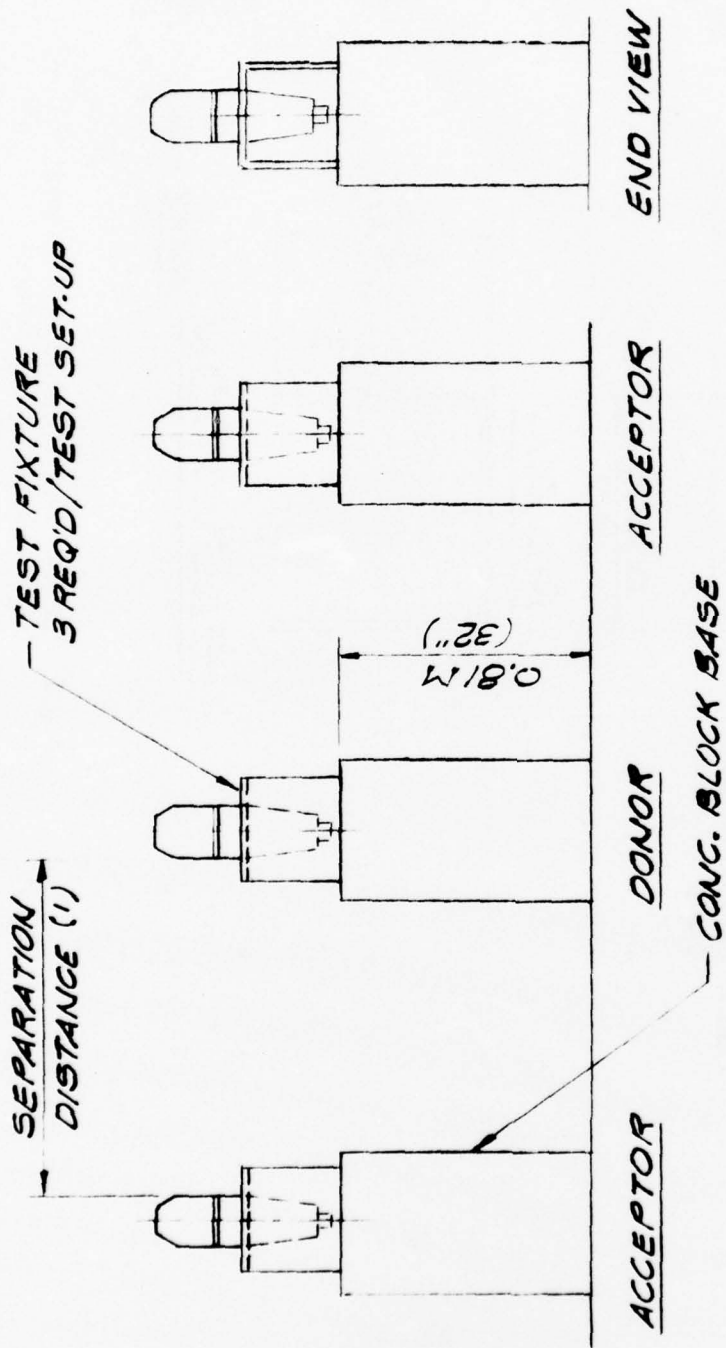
81-mm projectile support fixture (single projectile/fixture)
